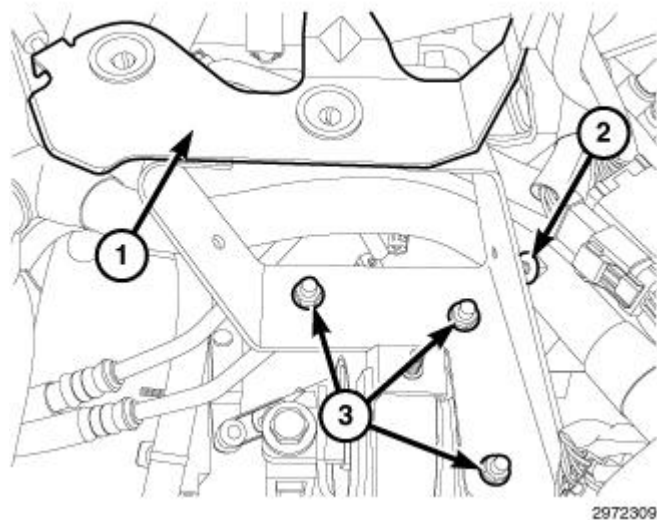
Wire Harness Loom Clips, Coolant Bottle Bracket & Nuts
